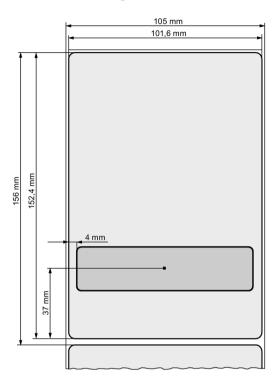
SIMATIC RF630L 6GT2810-2AB00 dimension drawing
